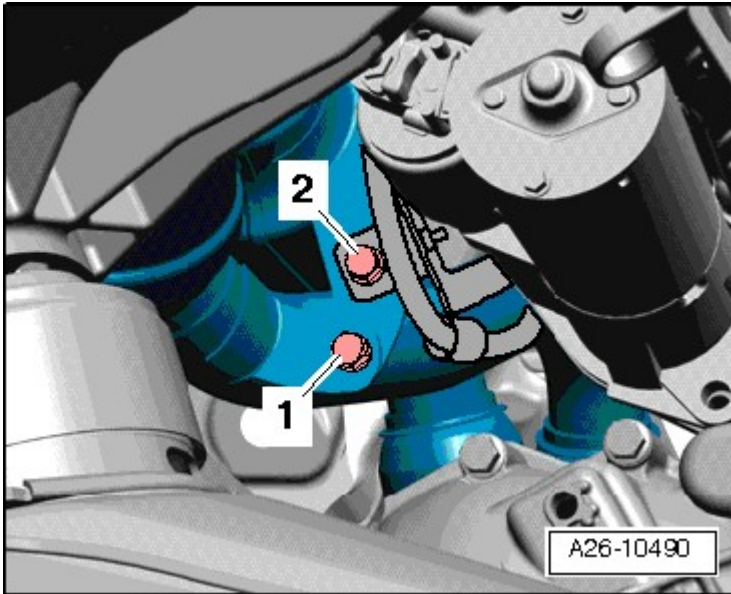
Identifying Primary Catalytic Converter Bracket Bolts
